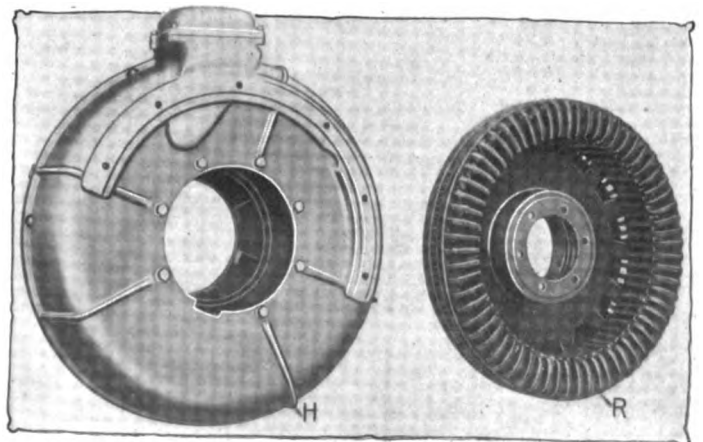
Outer casing and inner rotating member of dynamo-starter
